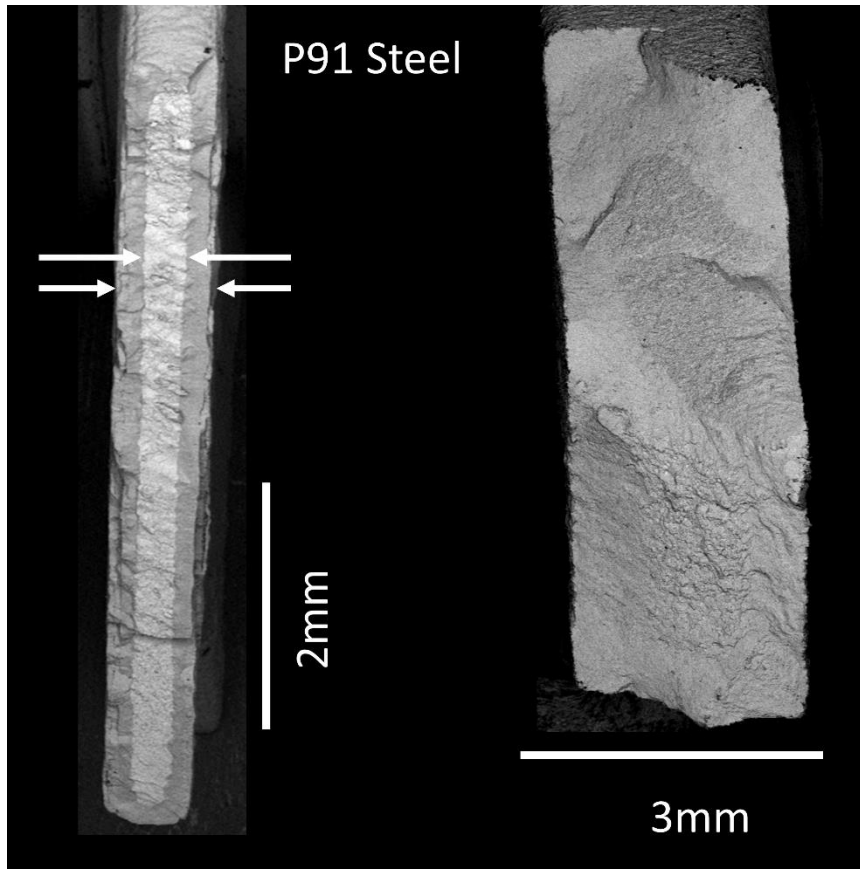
Fracture surface from P91 Steel exposed to DF4 environment for 1000 h, (Left) Thin specimen, (Right) Thick specimen.
